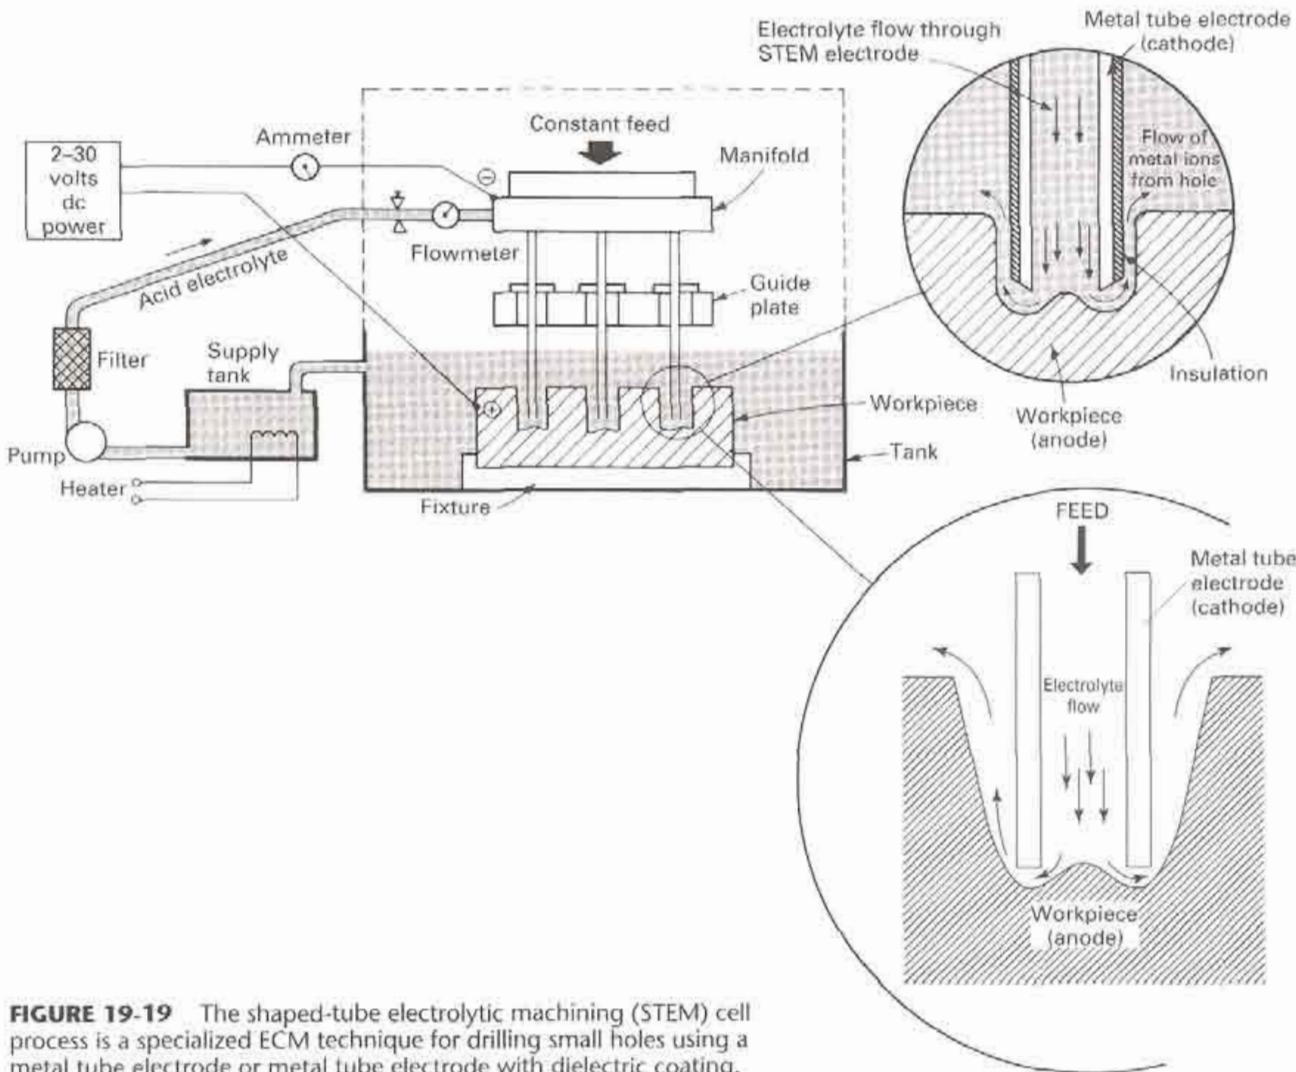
The shaped-tube electrolytic machining (STEM) cell process is a specialized ECM technique for drilling small holes using a metal tube electrode or metal tube electrode with dielectric coating.
